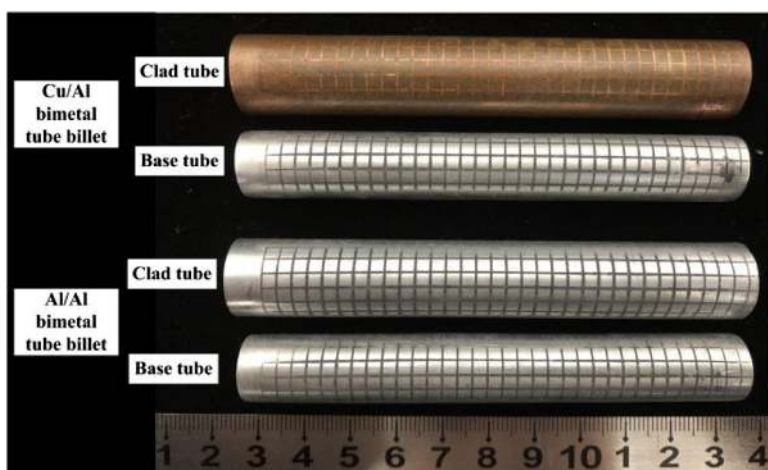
Electrochemically clad tube and base tube of bimetal tube billet
